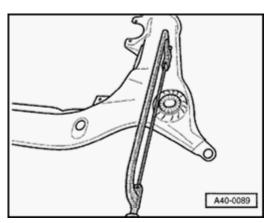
Sawing Off/Cut-Off Rubber Shoulder On Sub-Frame Mounting Courtesy of VOLKSWAGEN UNITED STATES, INC.
